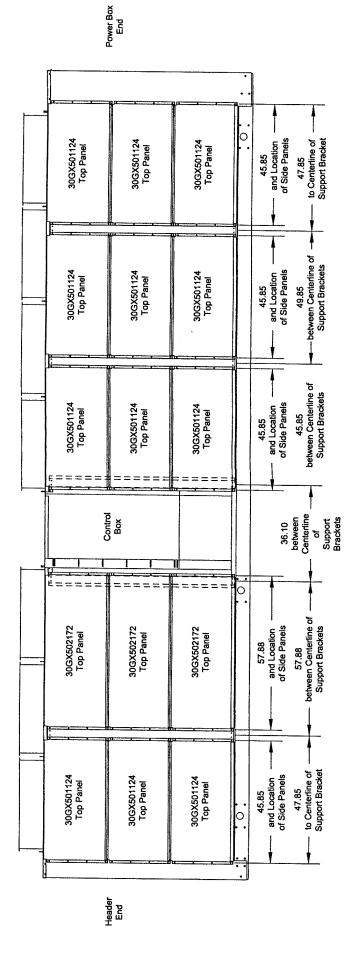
Unit Assembly, 30GX251,265 Oil Separator Side Only
